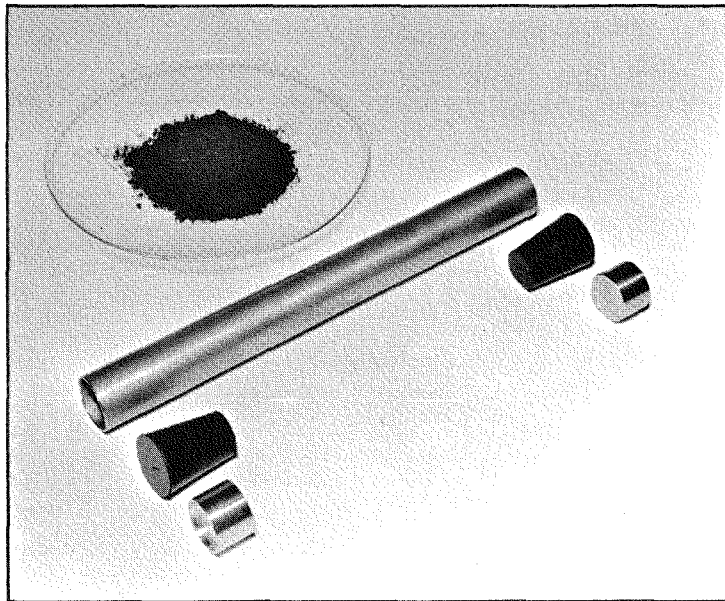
Uranium dioxide powder, sheath, rubber plugs and welded plugs used in fuel element assembly.
